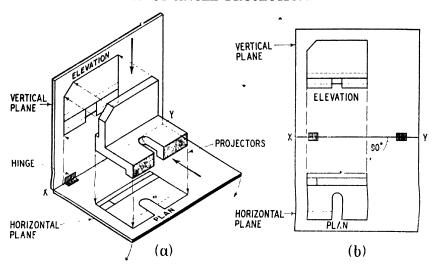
ILLUSTRATING FIRST ANGLE PROJECTION OF ELEVATION AND PLAN VIEW
